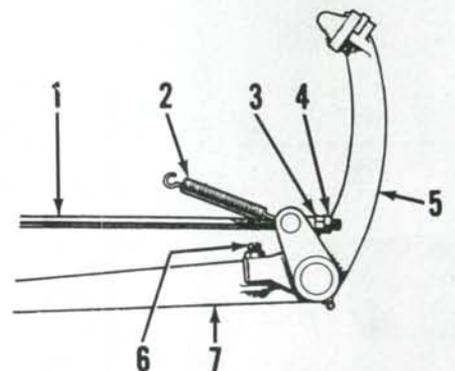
View of typical brake pedal used on models equipped with mechanical drum brakes.
